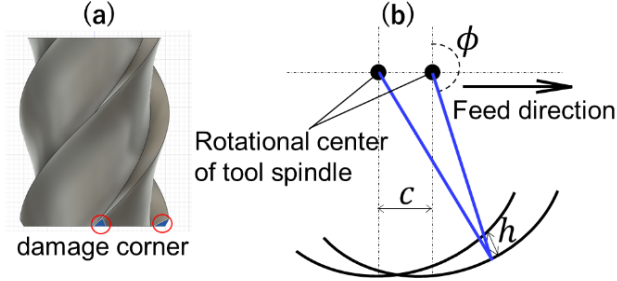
Milling process model; (a) damage corner (b) uncut chip thickness.
